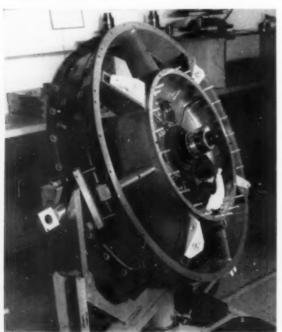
Vertical boring machines face, turn and bore the cast magnesium front frame.
